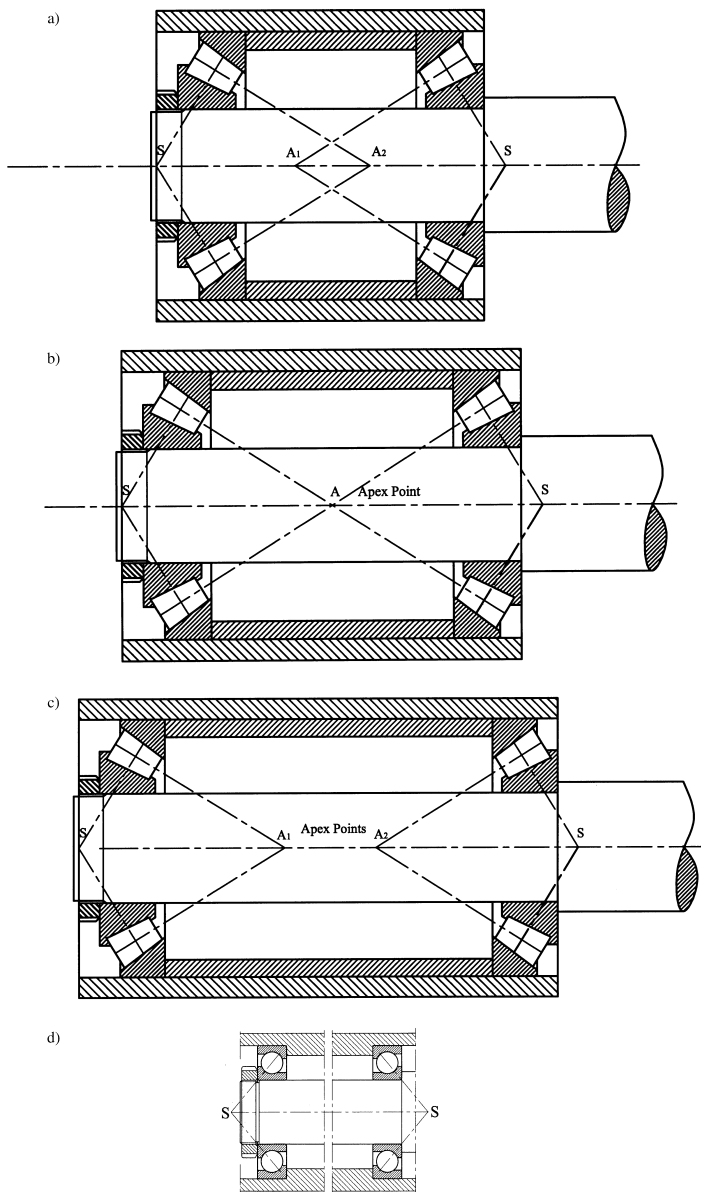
(a) Adjustable arrangement, apex points between the bearings overlap. (b) Adjustable arrangement, apex points coincide between the two bearings. (c) Adjustable arrangement, apex points apart between the bearings. (d) Similar adjustable arrangements for angular contact bearings.
